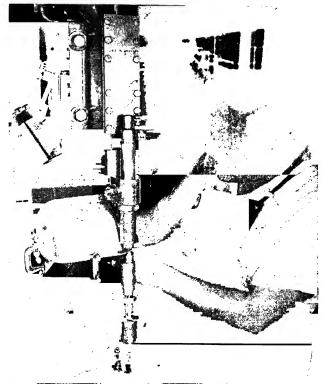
44.—Spot welder in use. (Douglas Aircraft, Inc.)
